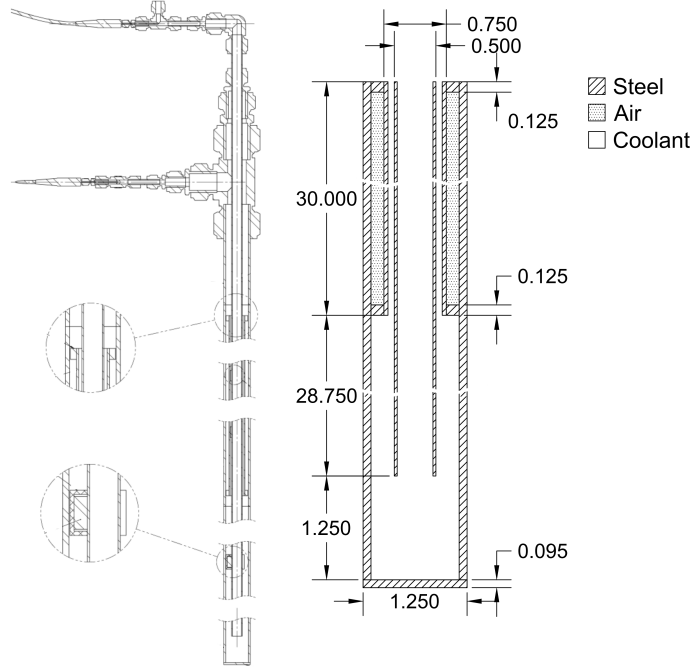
Insulated bayonet freeze tube assembly (dimensions in inches)
